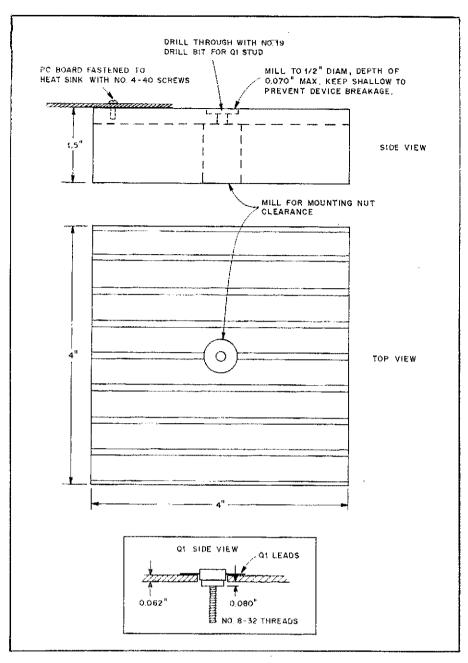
Heat-sink drilling dimensions for the VHF amplifiers. Overall heat-sink size isn't critical, but should be close to the dimensions shown. As an alternative to milling the heat sink to accept Q1, a piece of 1/16-in. double-sided PC-board material can be used as a shim. Be careful not to stress the transistor lead-to-body connections during mounting.
